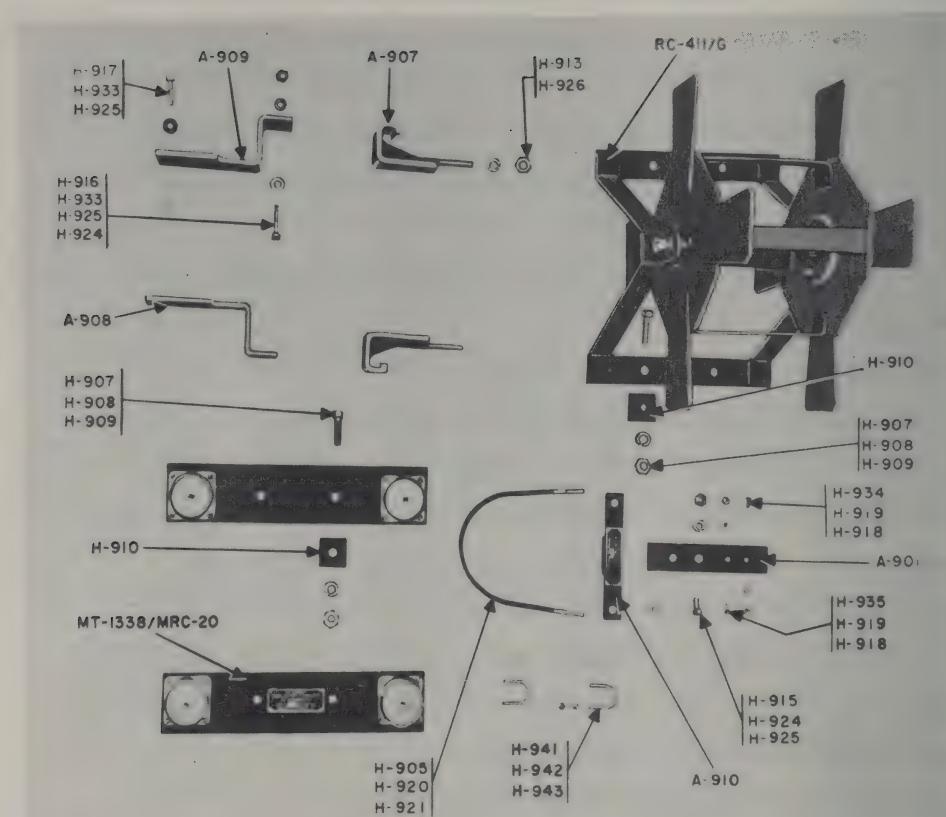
Installation Parts, M-38 Truck and Trailer.
